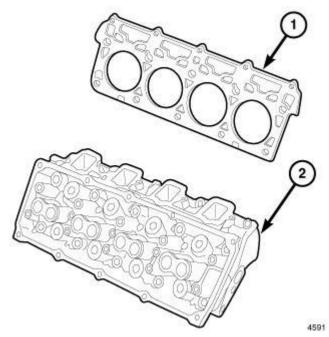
Cylinder Head Components Courtesy of CHRYSLER LLC
